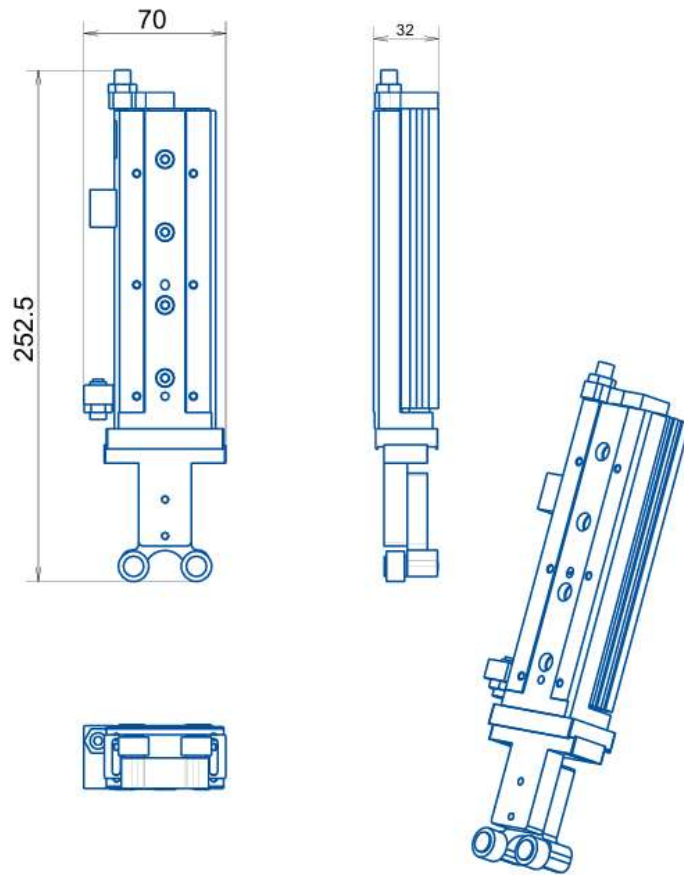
Technical specifications of tape pressing mechanism design 2.
